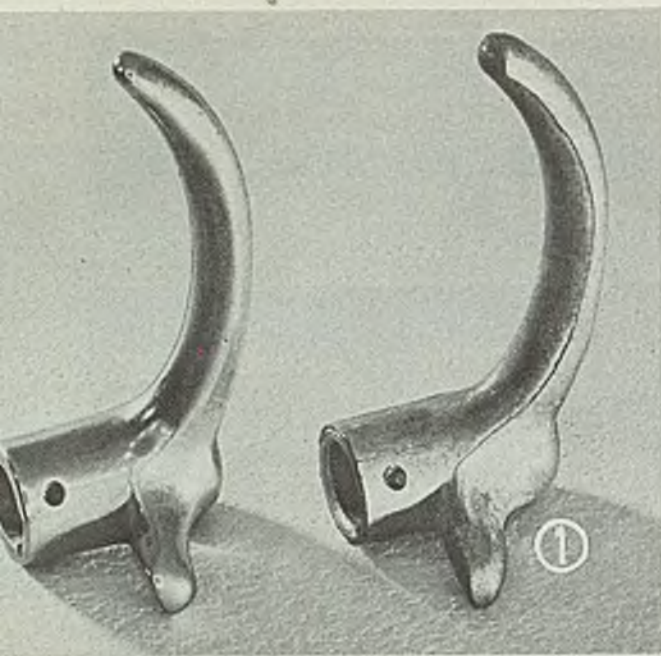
Brightening of finish, removal of parting line and uniform rounding of edges can be noted in this processed zinc die casting
